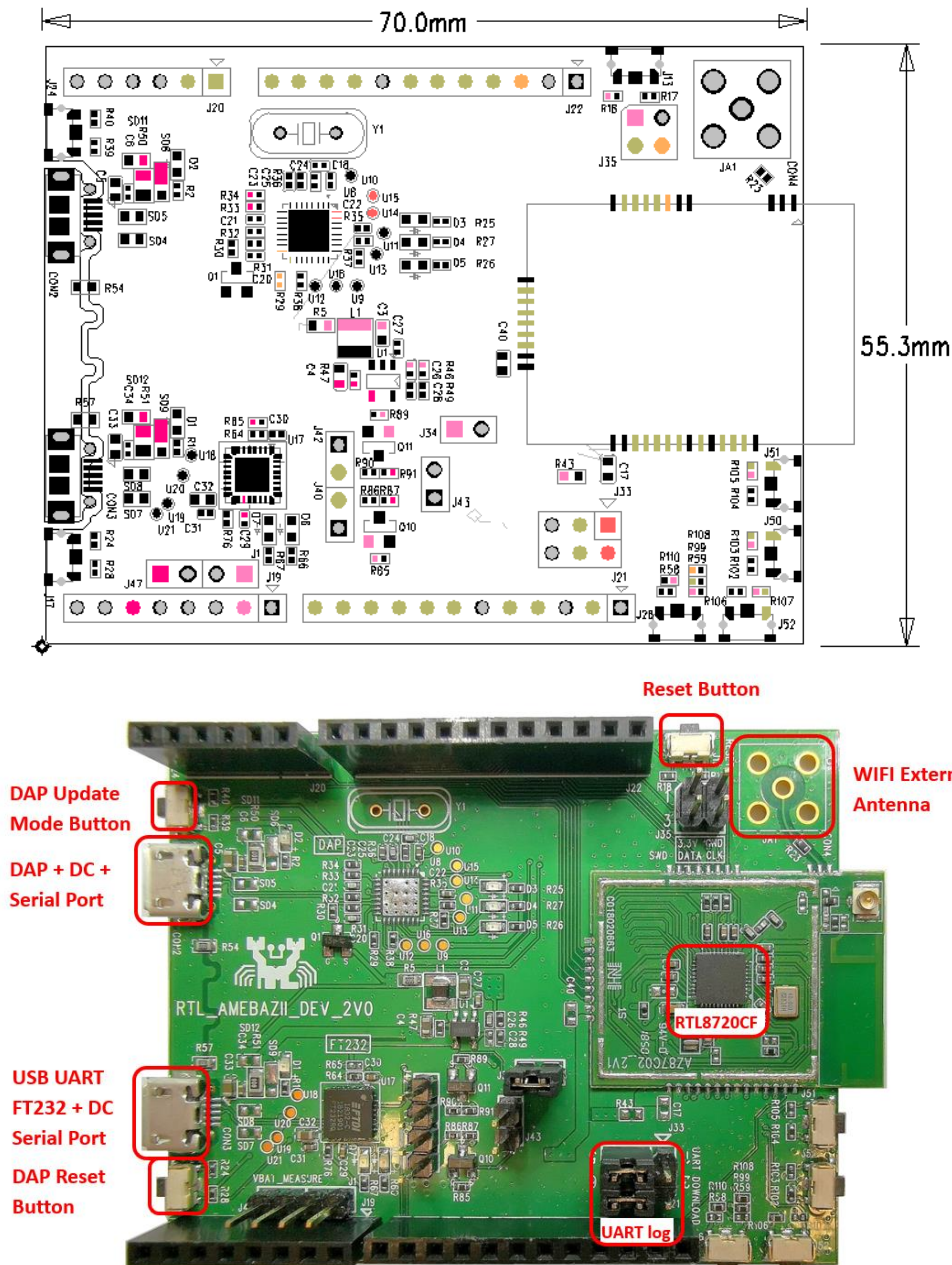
Ameba-ZII 2V0 Dev Board PCB Layout
